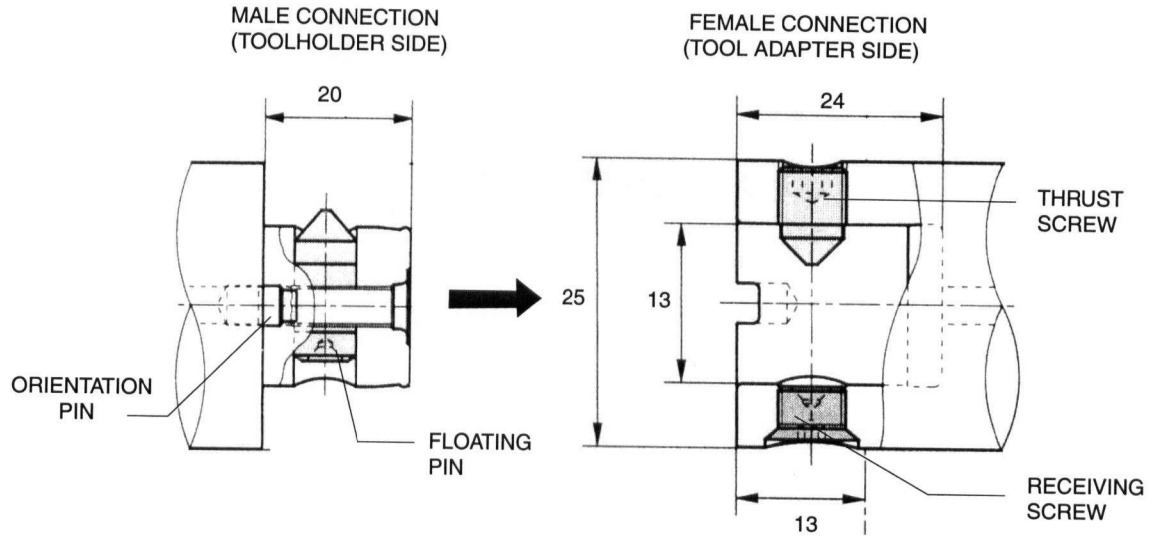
Komet ABSN25 clamping system (dimensions in mm).
